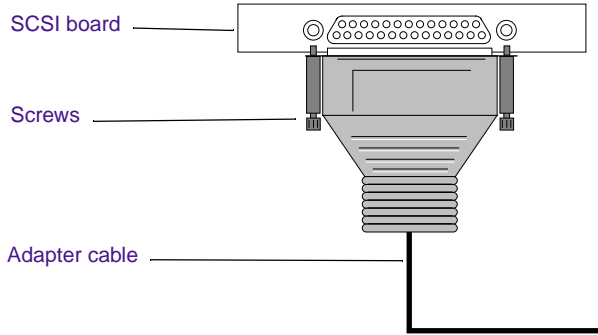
Connecting the Adapter Cable to the SCSI Board
